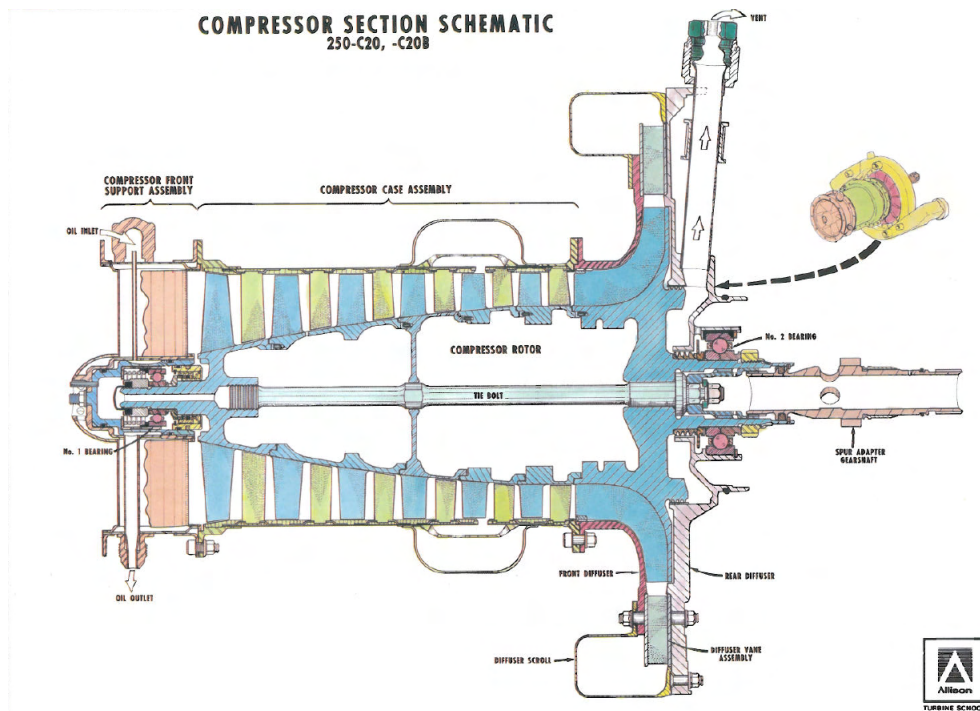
A-250 Gas turbine compressor cutaway [2]
